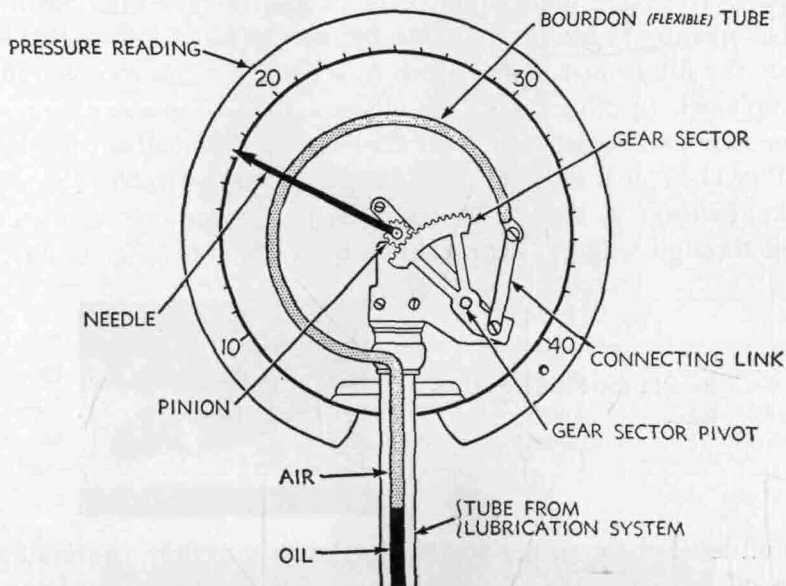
Bourdon tube and linkage to indicating needle used in pressure-expansion oil-pressure indicator.
